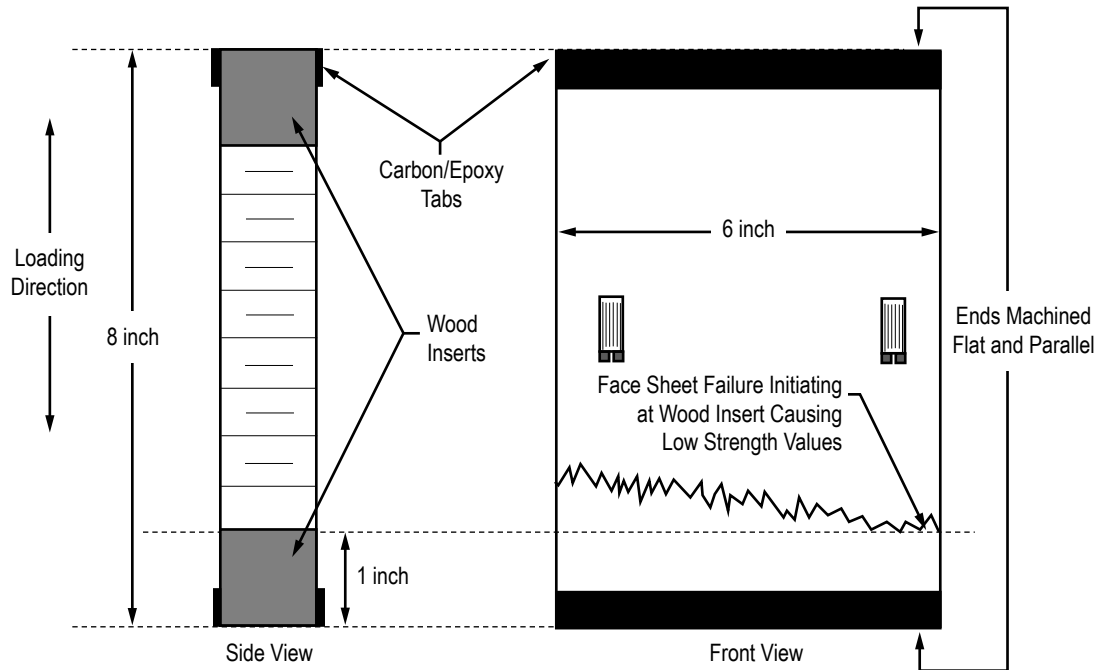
Schematic of wood inserts causing premature face sheet compression failures on larger test specimens.
